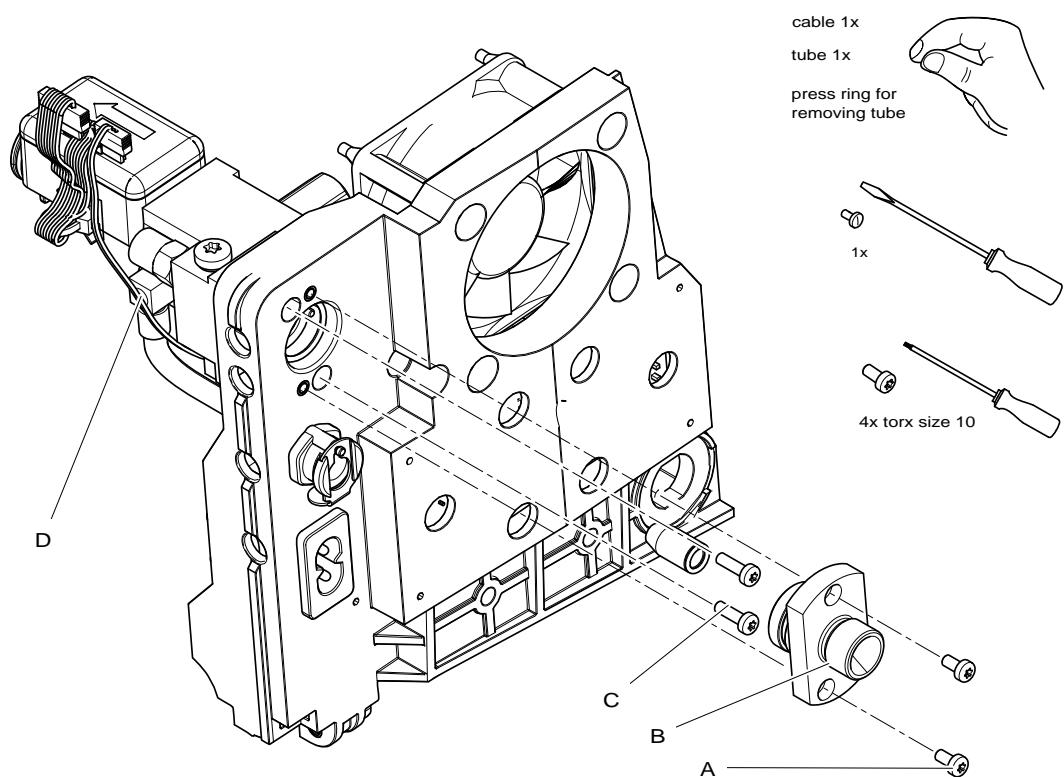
O2 Mixer, DISS / NIST Connector Removal/Assembly
